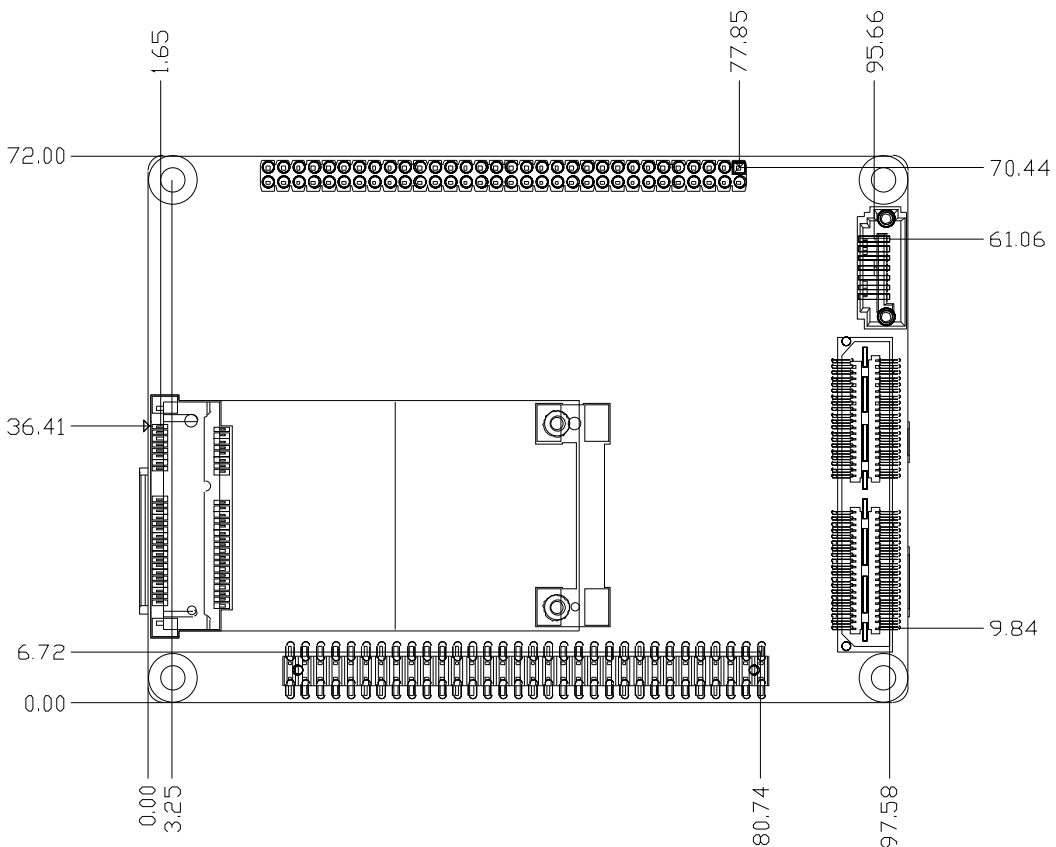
MIO-2262 Mechanical Drawing (Bottom Side)
